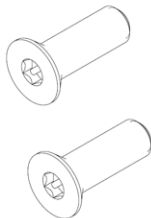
1/4-20 x 3/4 Security (Center Pin) Flathead Screws for Hand Hole Cover
